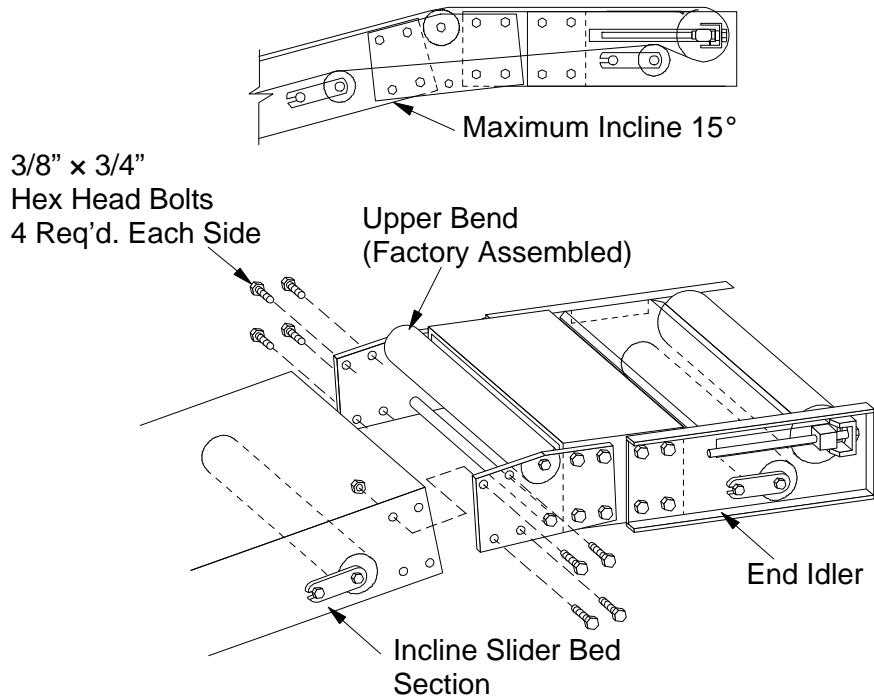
Attaching the Upper Bend Unit to a Terminal End
